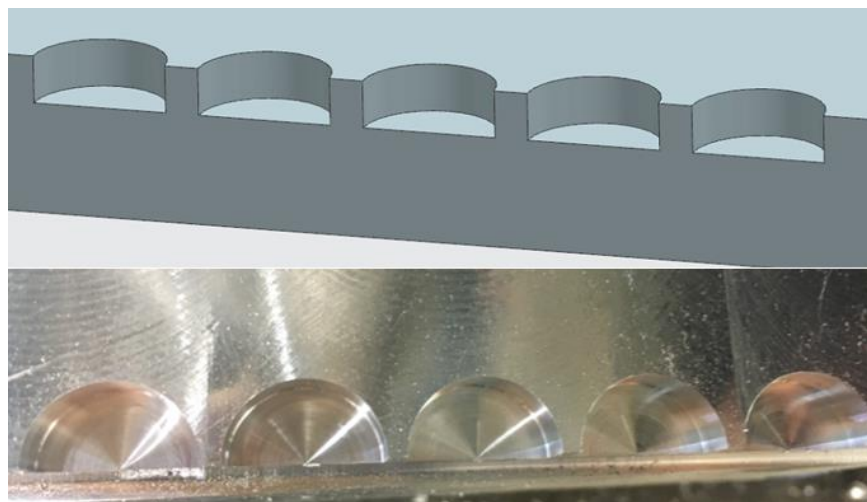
Half plunge milling workpiece (bottom), CAD model of the workpiece (top)
